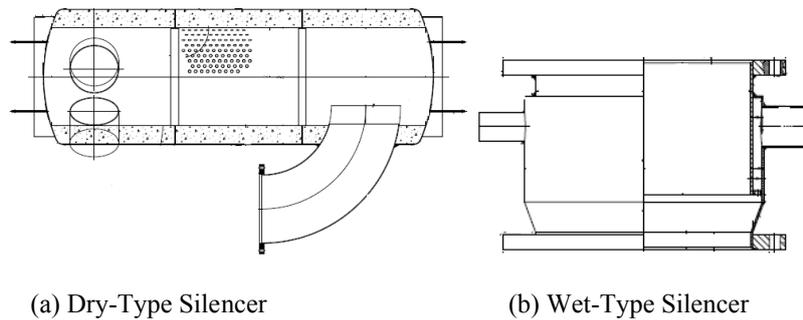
Technical Drawings Belonging to Dry and Wet-Type Silencers [6]
